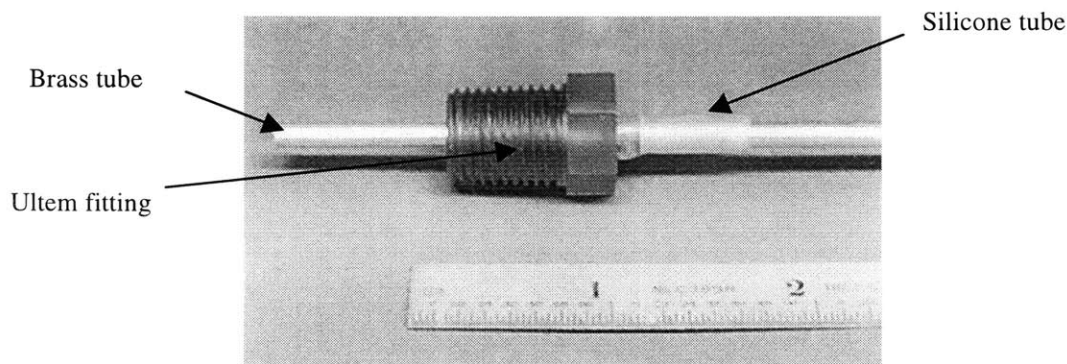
Picture demonstrating how a Silicone tube can be used to achieve a leak proof joint at the Ultem fitting-Brass tube interface.
